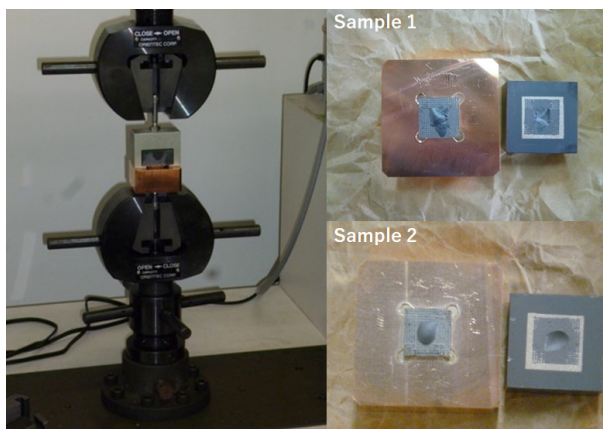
Picture of the tensile testing machine (left) and the fracture of SiC after tensile test (right).
